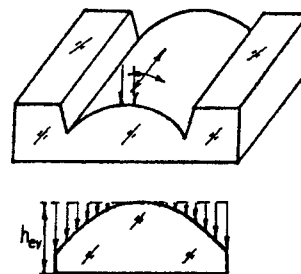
Schemes of laser evaporation of cylindrical surfaces
